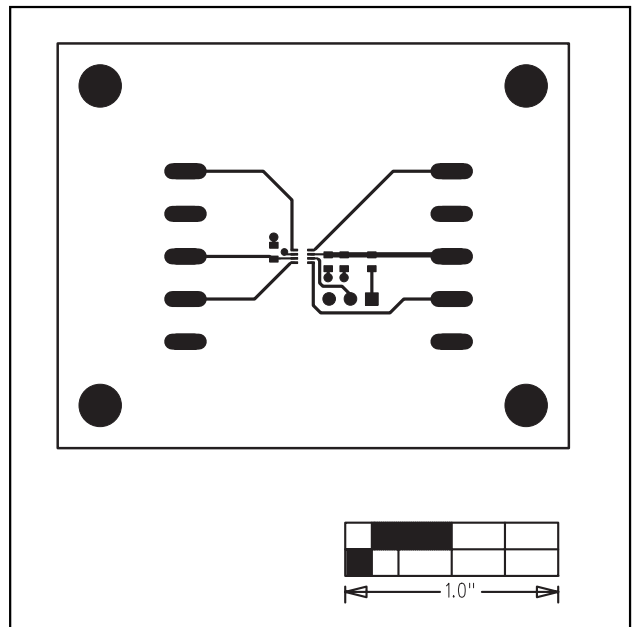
MAX3397E EV Kit PCB Layout—Component Side
